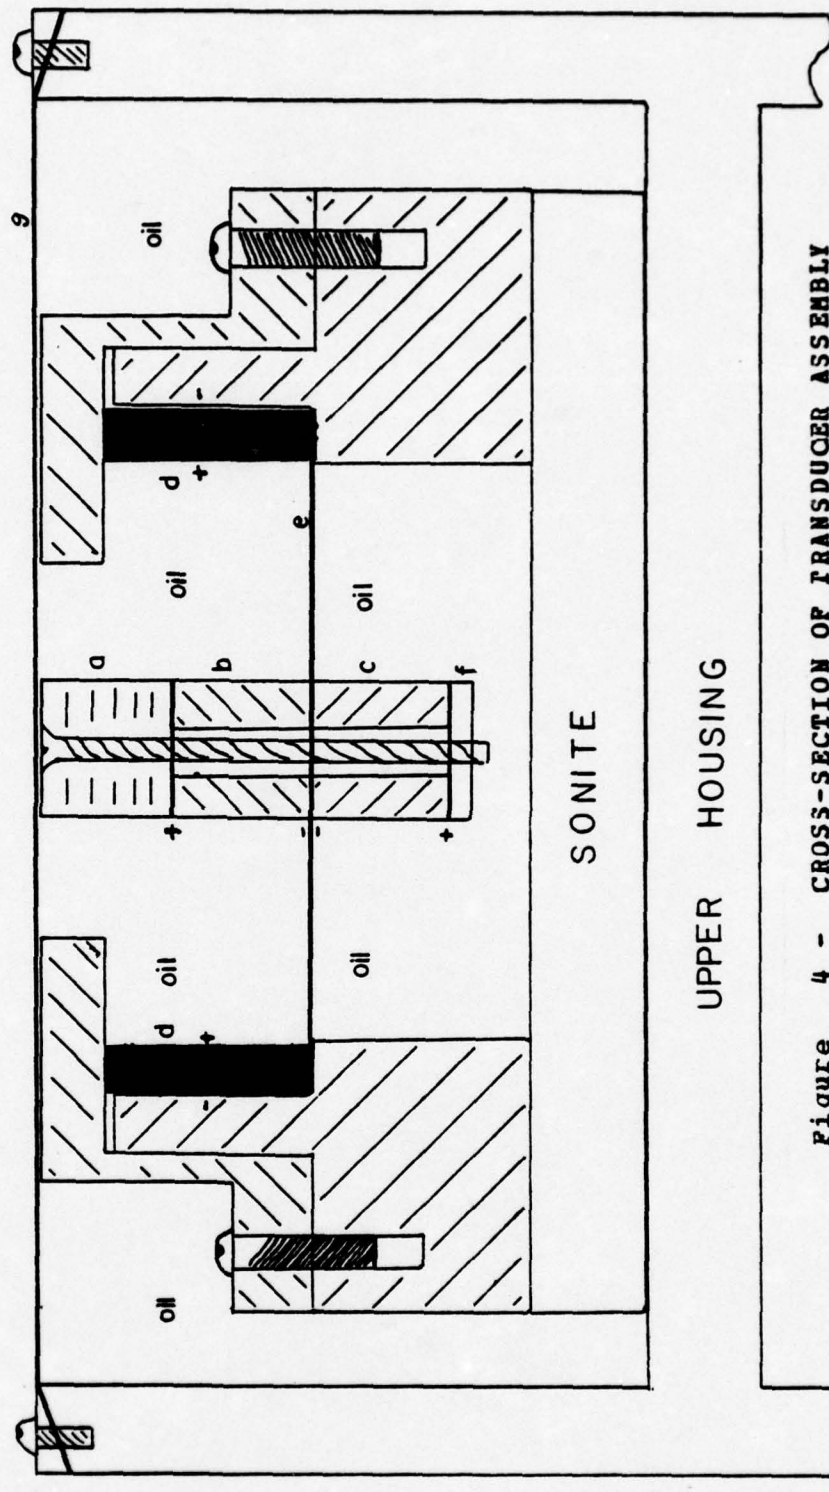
CROSS-SECTION OF TRANSDUCER ASSEMBLY
